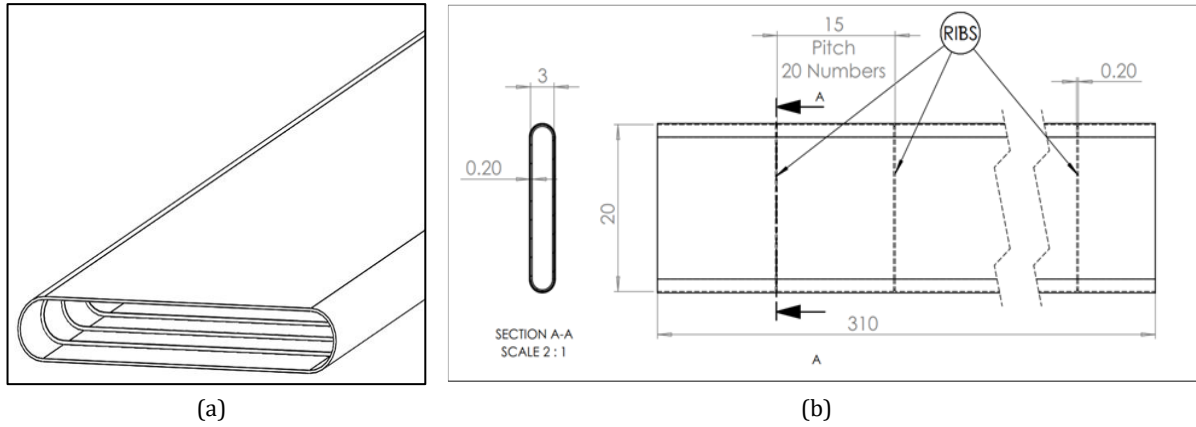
Ribbed flat tube configuration (a) isometric view (b) Side and top view with specification
